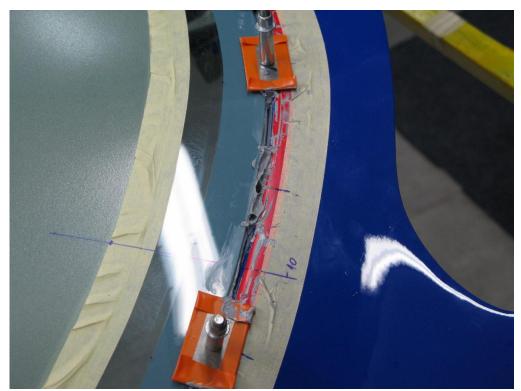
Remove the sealant under the dismantled cleco fasteners
